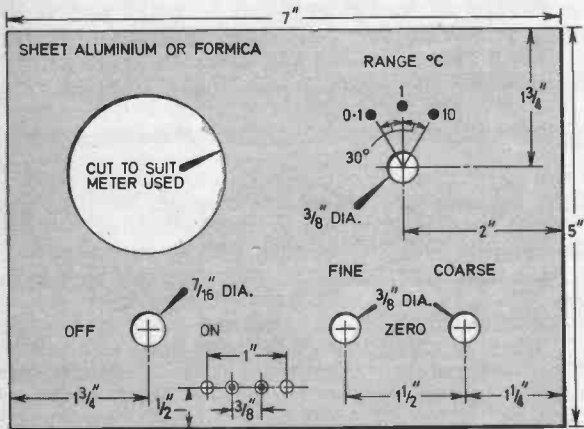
(left) The dimensions of the front panel which can be made from aluminium sheet or formica.
